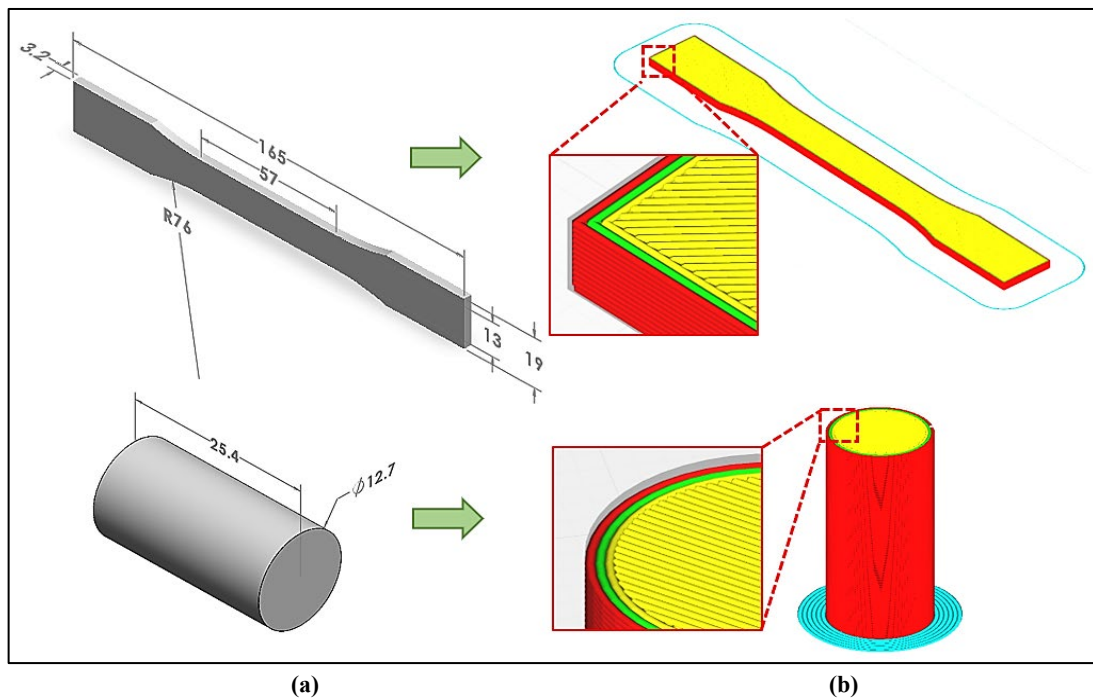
Steps of preparing the tensile and compression specimens, (a) CAD model design, (b) Slicing the models
